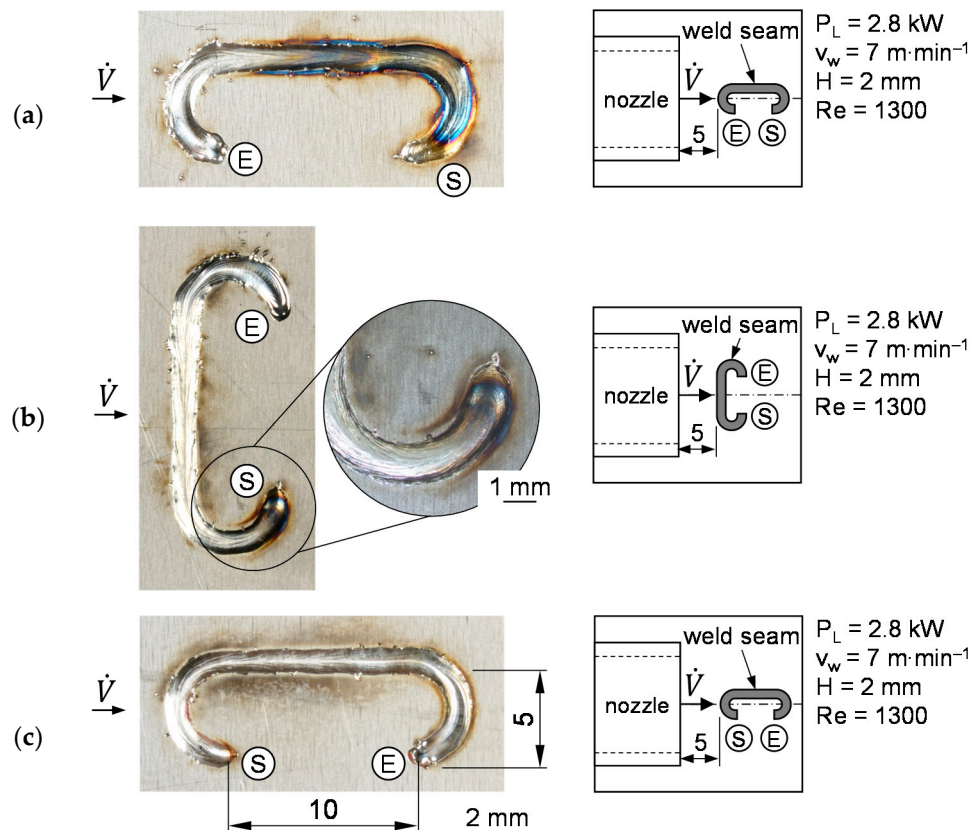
Effect of welding direction on shielding gas coverage and Schlieren images at weld seam center.
